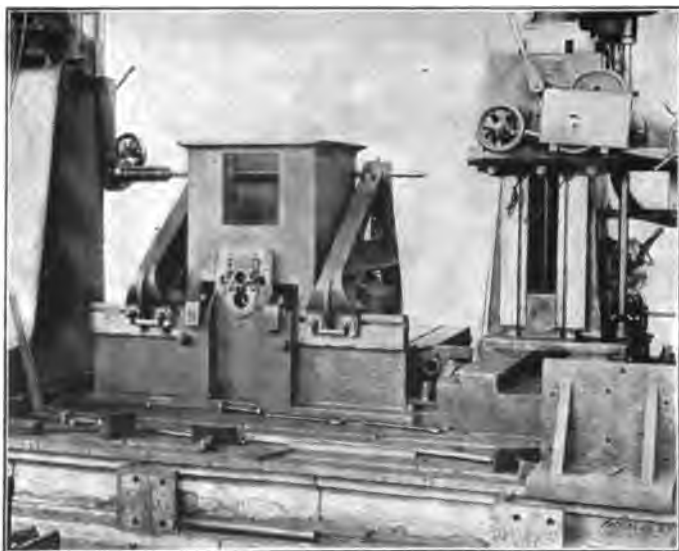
Large Drilling and Boring Jig for Machine Beds
